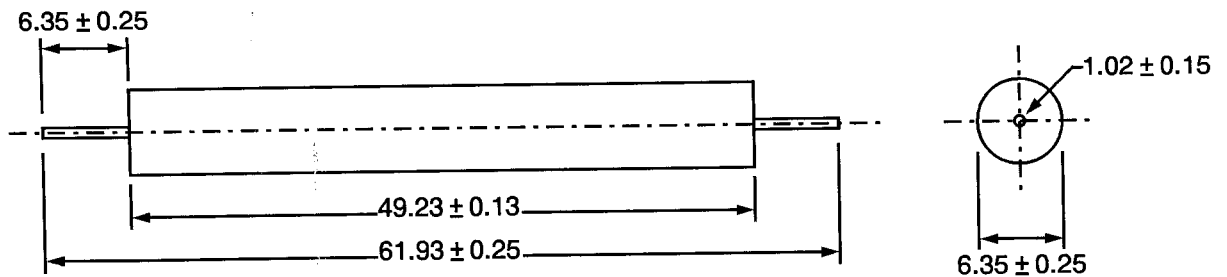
FIGURE III - TEST FIXTURE TF-B (FOR AXIAL LEADS)
